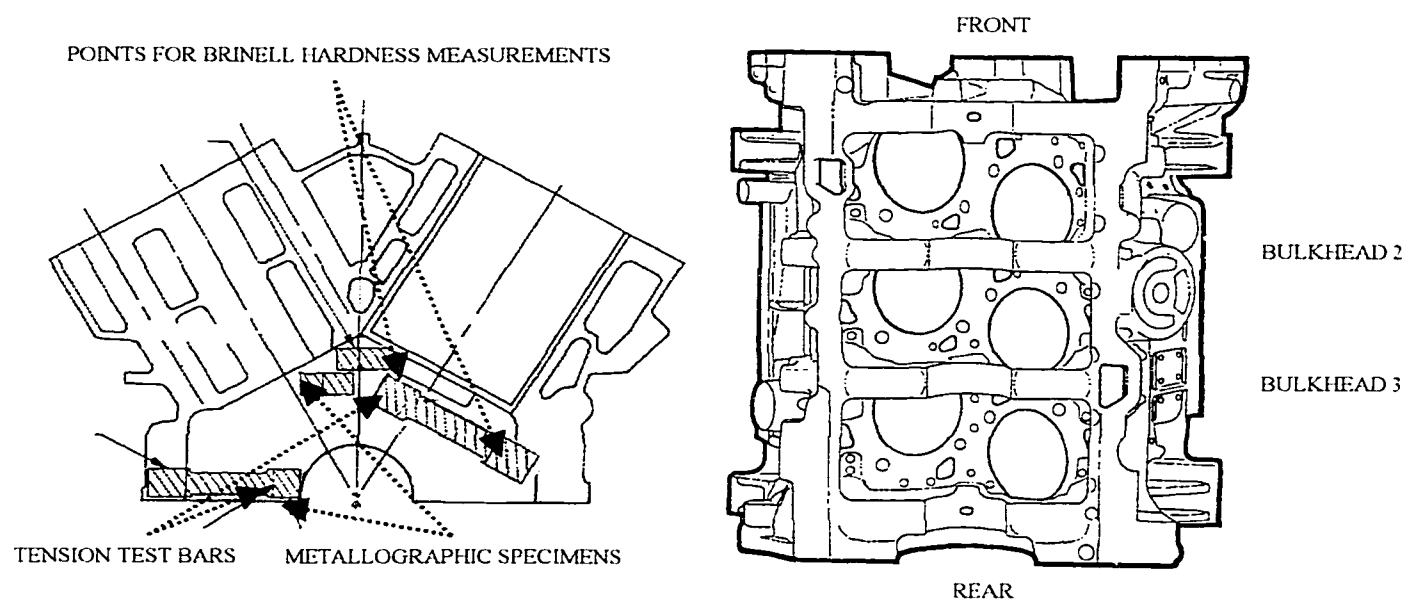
3.0L Engine Block Cross-Section Showing the Location of Test Specimens
